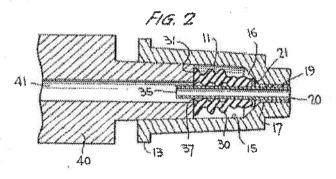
depicts a sectional view of a catheter assembly having a similar valve member 30 shown with a male luer adapter 40 inserted into the catheter hub and axially collapsing the valve member 30 around insert member 20 (Vaillancourt '766, col. 3, Il. 29-31 and col. 5, Il. 47-51). Vaillancourt '766 teaches that valve
